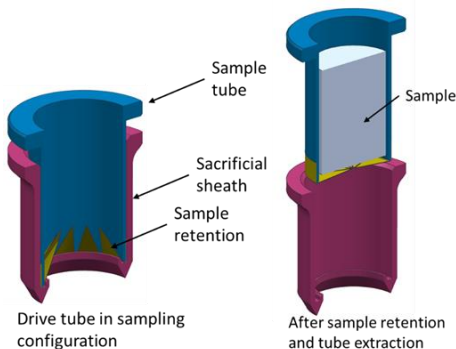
Drive tube in sampling configuration (left) and after sample acquisition and separation (right)
